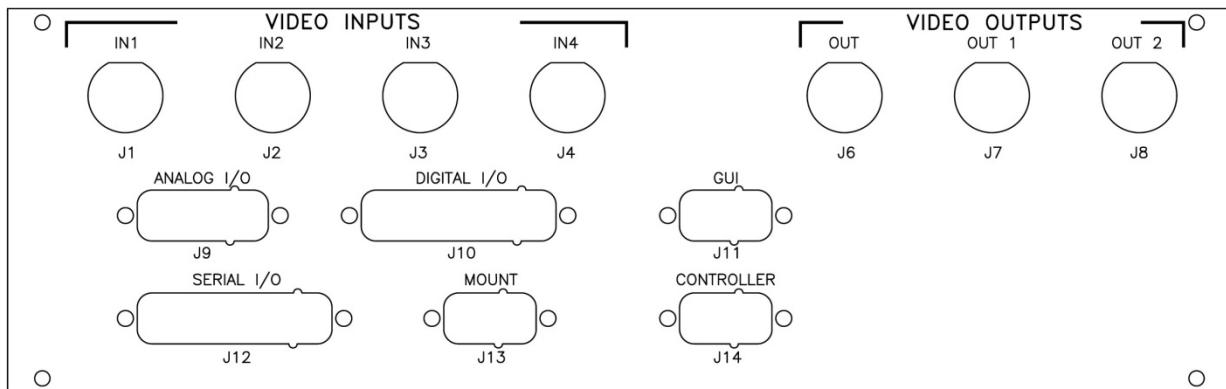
Rear Panel Layout 2U Chassis (Rev B)
